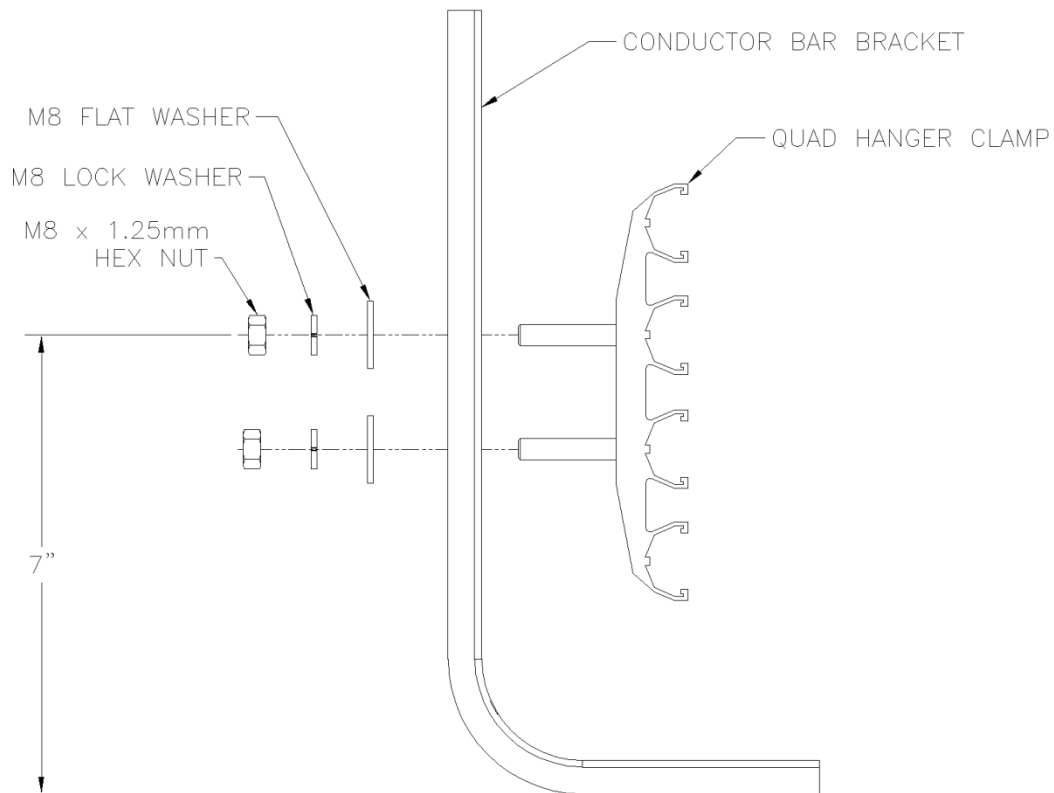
(Conductor Bar Hanger Clamp Assembly)
